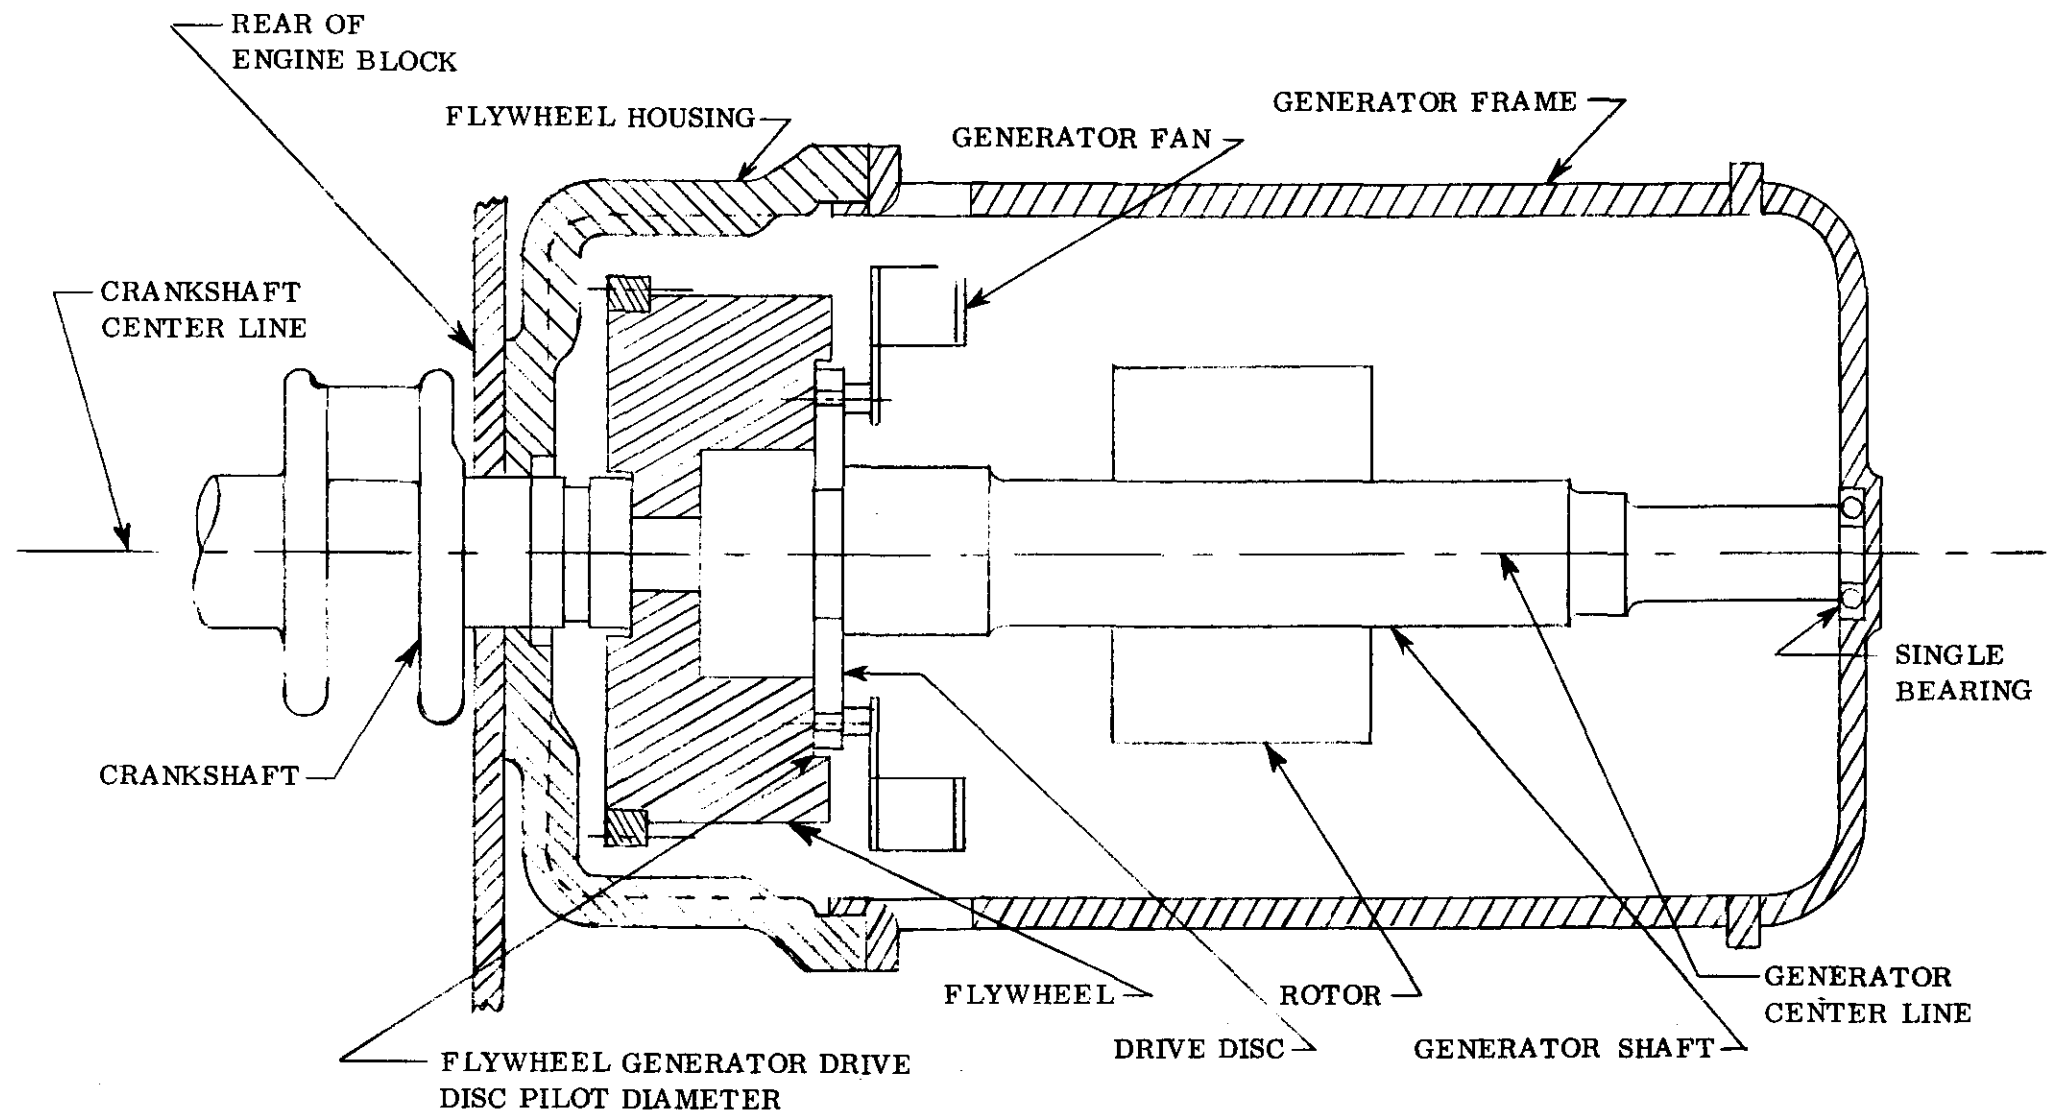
ENGINE - SINGLE BEARING GENERATOR ASSEMBLY
